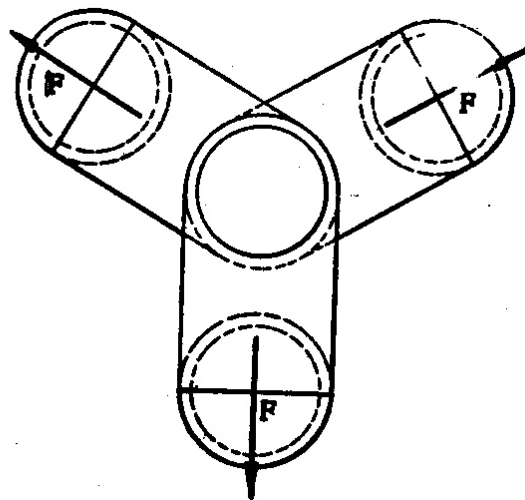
End view of Six-throw, seven-bearing crankshaft.
